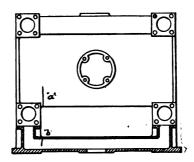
H.P. Cylinder with separate exhaust chamber.
